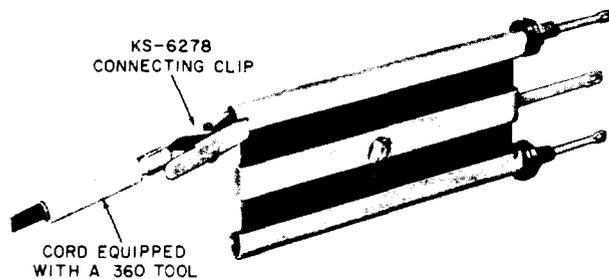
Connecting to Ferrule of the 18- and 19-Type Resistors
